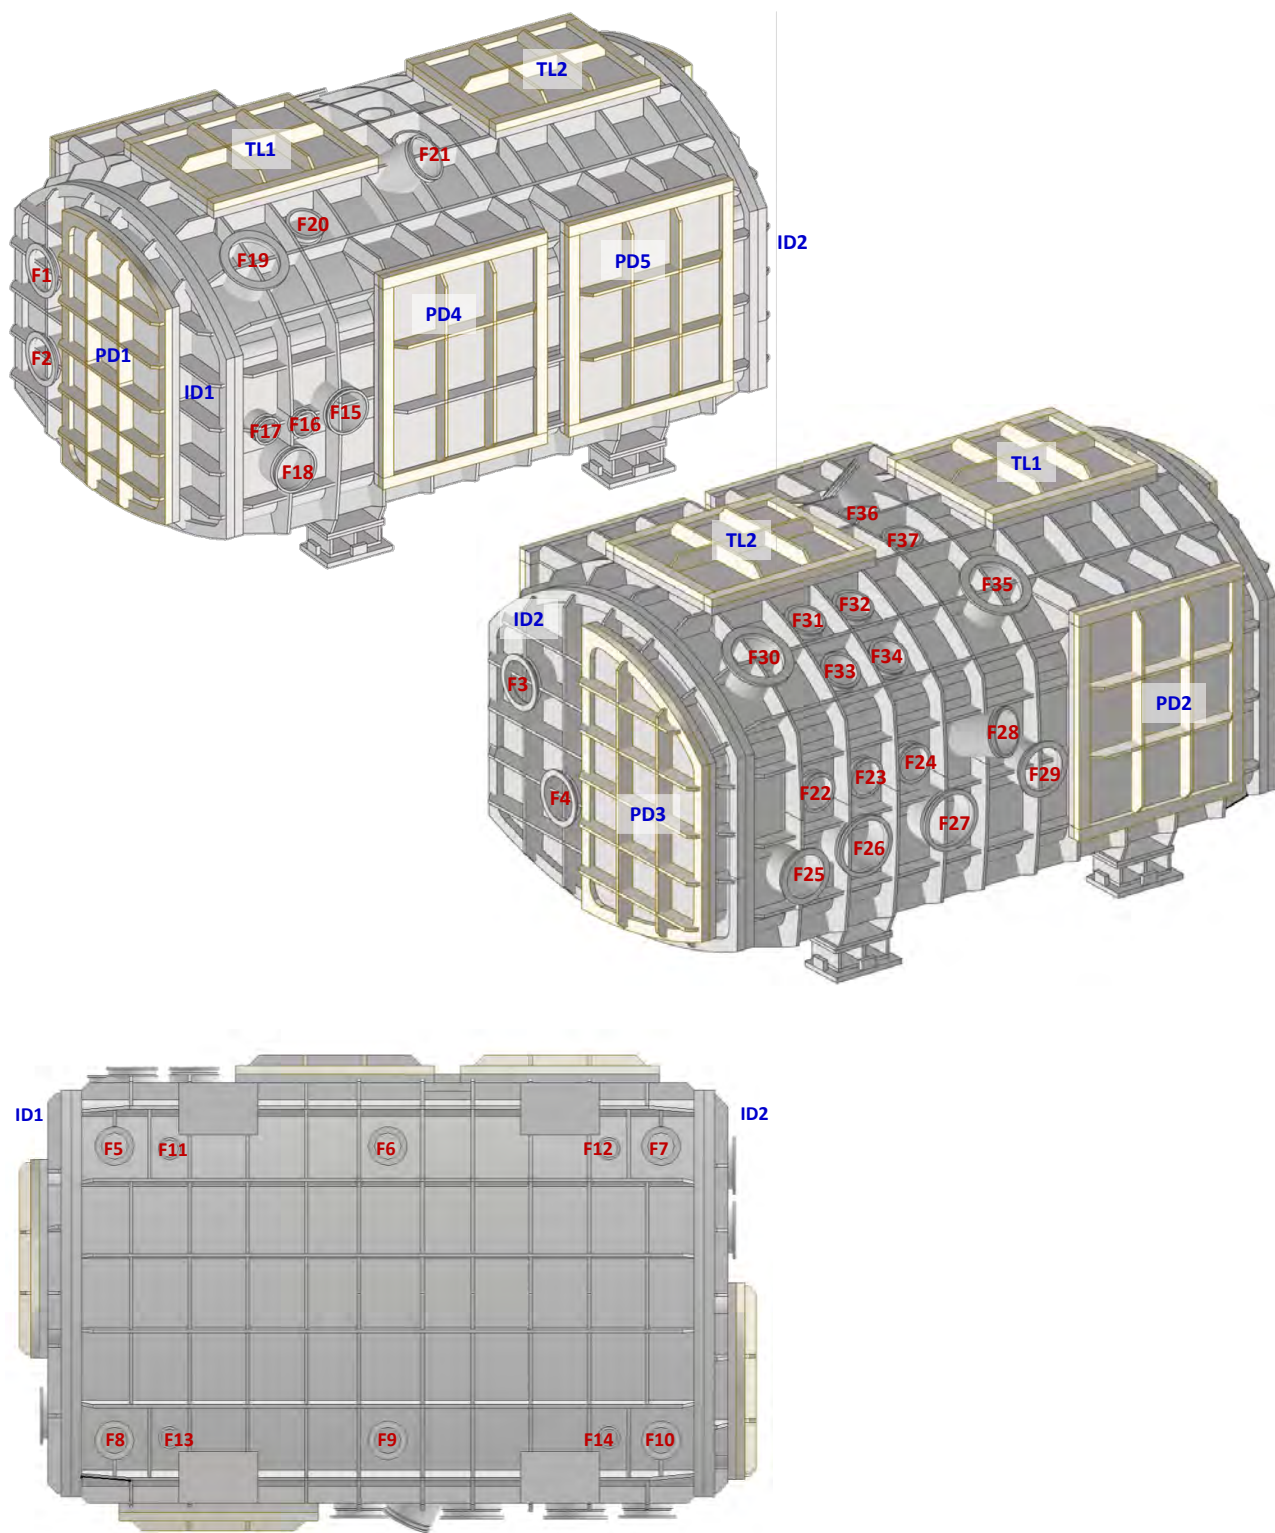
Doors, top lids, and circular flanges on the compressor chamber: views from North-East (above) and from South-West (middle), and view of the chamber underside (below).
